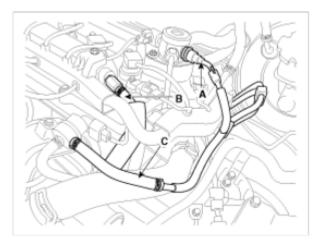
Identifying Vacuum Pipe Assembly Courtesy of HYUNDAI MOTOR AMERICA
